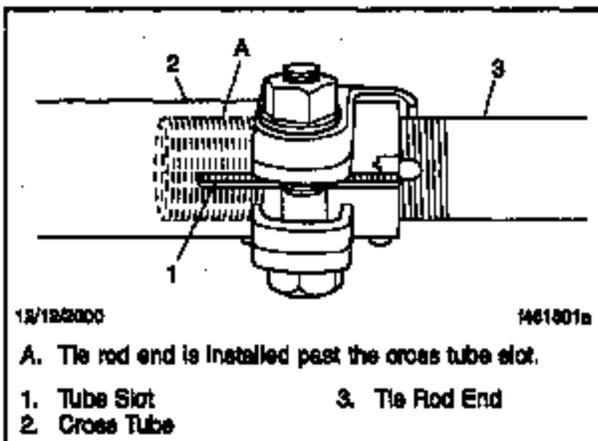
, Bottom View of Tie Rod End and Cross Tube
